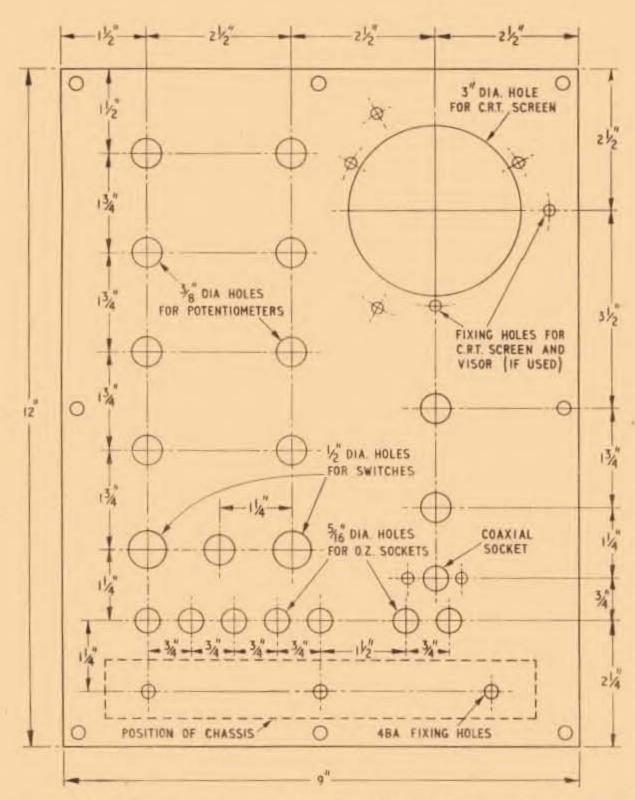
(left). The front panel drilling details. This panel consists of a piece of aluminium sheet 1/5 in thick
